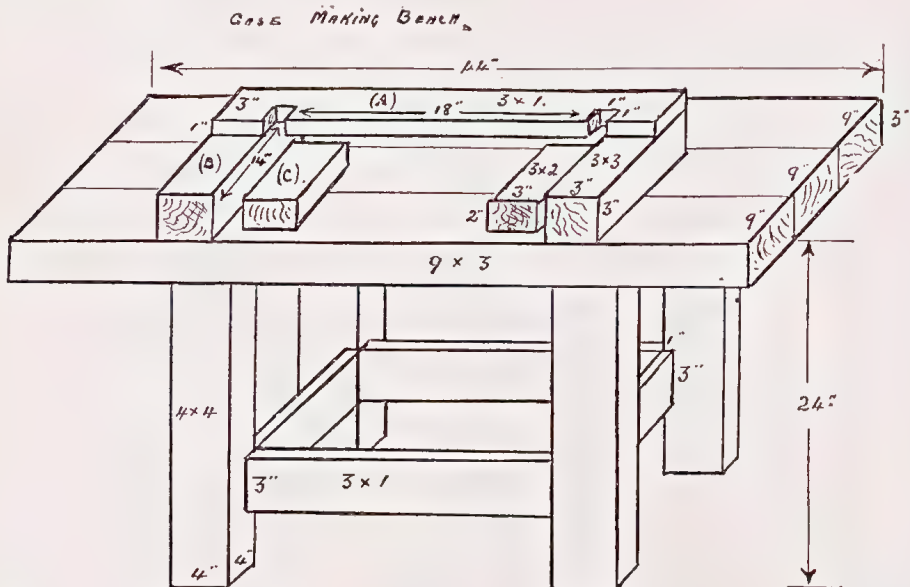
(Fig. 3).—CASEMAKING BENCH FOR MAKING AUSTRALIAN DUMP, CANADIAN STANDARD, BUSHEL AND HALF-BUSHEL CASES, AND OTHER FRUIT CASES, 18 INCHES IN LENGTH, INSIDE DIMENSIONS.
